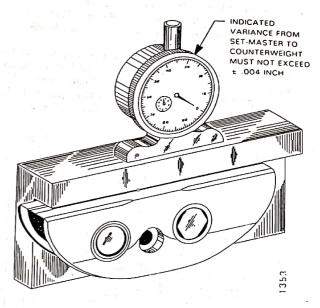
Checking Center Line Position of Counterweight Using Gage Fixture ST-94
